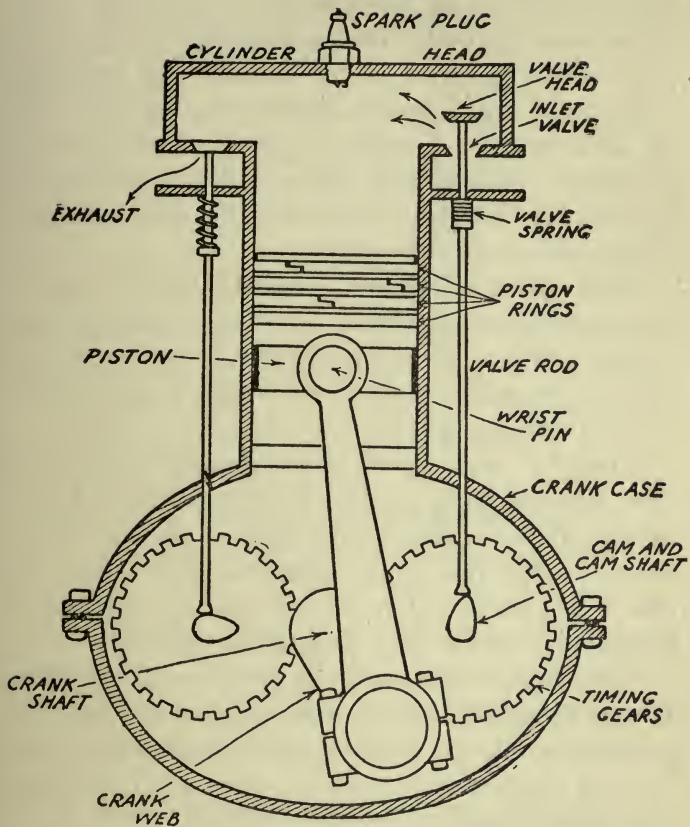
CROSS SECTION OF A SINGLE CYLINDER T-HEAD ENGINE
